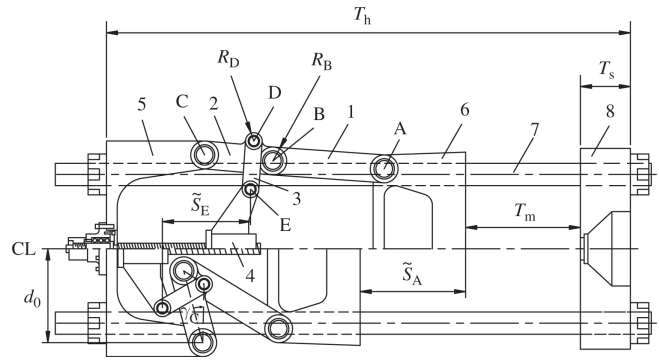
Fanuc five-point double-toggle mould clamping mechanism
